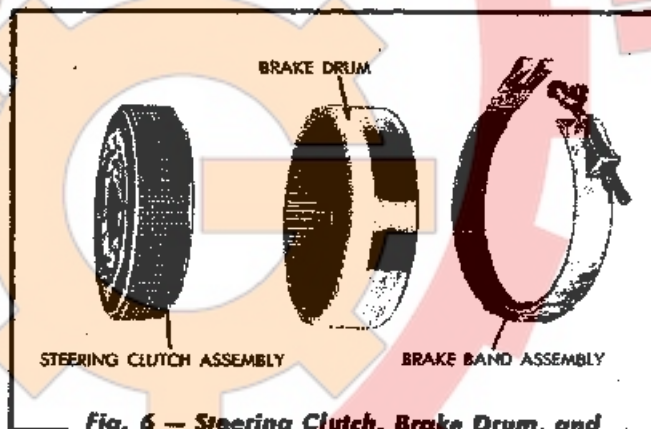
Steering Clutch, Brake Drum, and Brake Band
